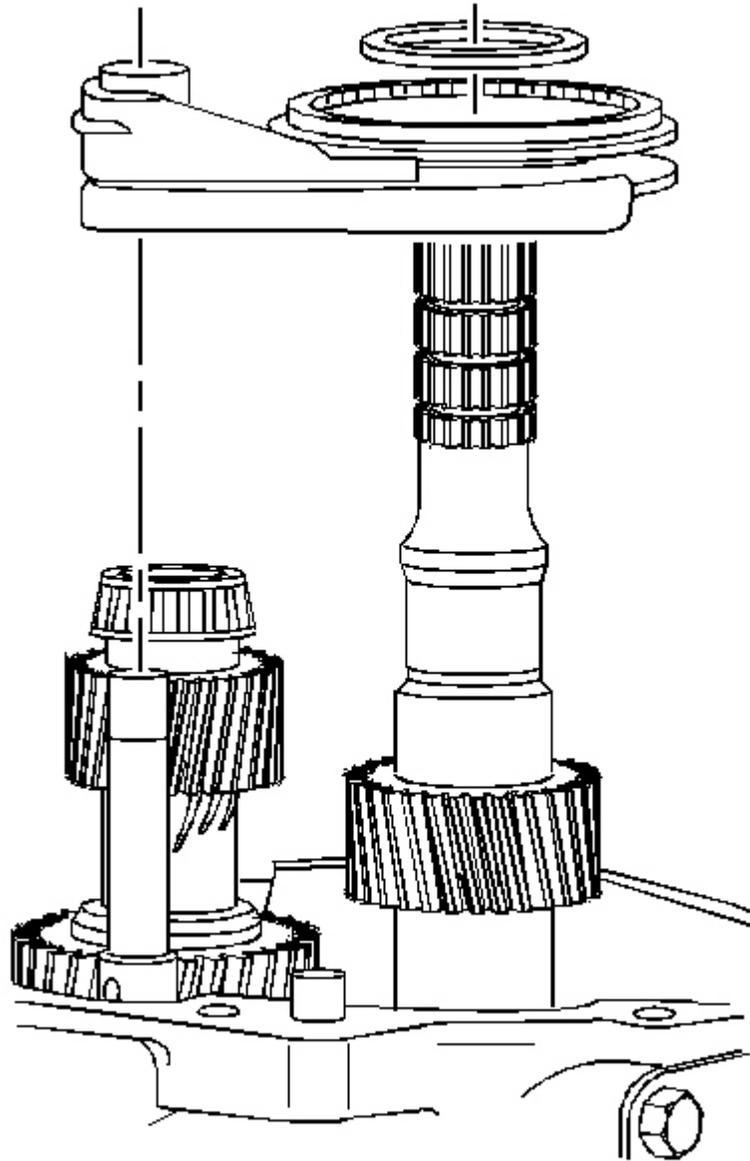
Identifying Reverse Shift Fork, Synchronizer & Thrust Washer
